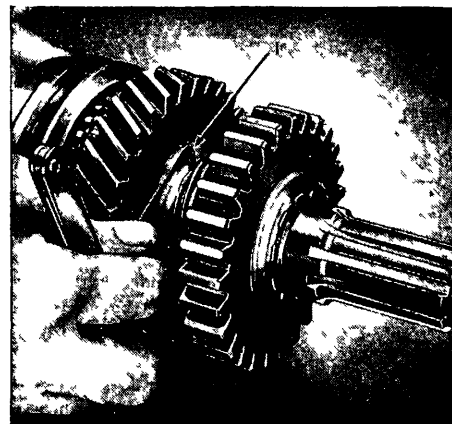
Checking low speed gear end play with feeler gauge (1). 1941-42 vacuum-operated transmission
